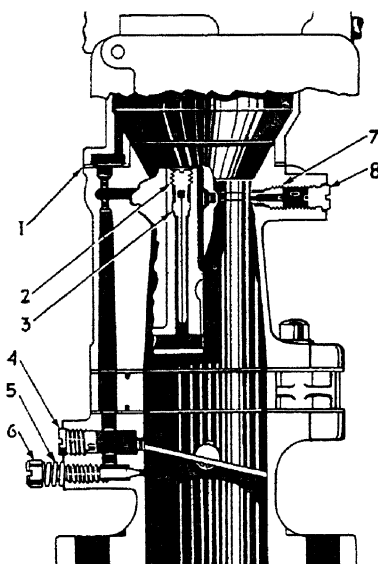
Front Sectional View of Chrysler Carburettor.
